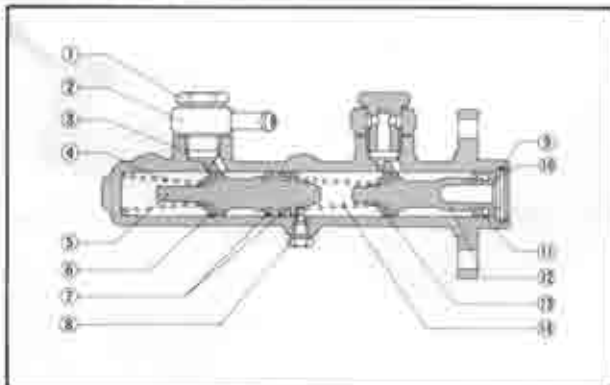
Dual master cylinder cross section (Left hand drive vehicles)
